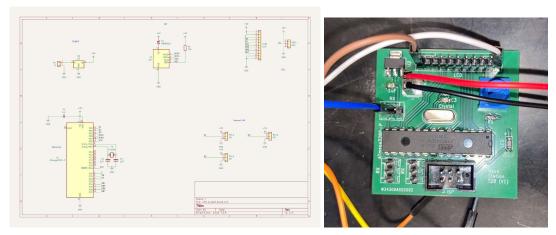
The PCB schematic (left) and the PCB upon arrival (right)
